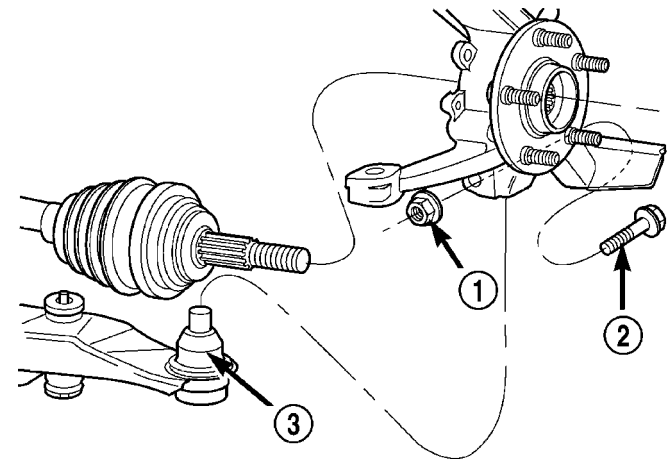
Driveshaft Installation Into Hub And Steering Knuckle
